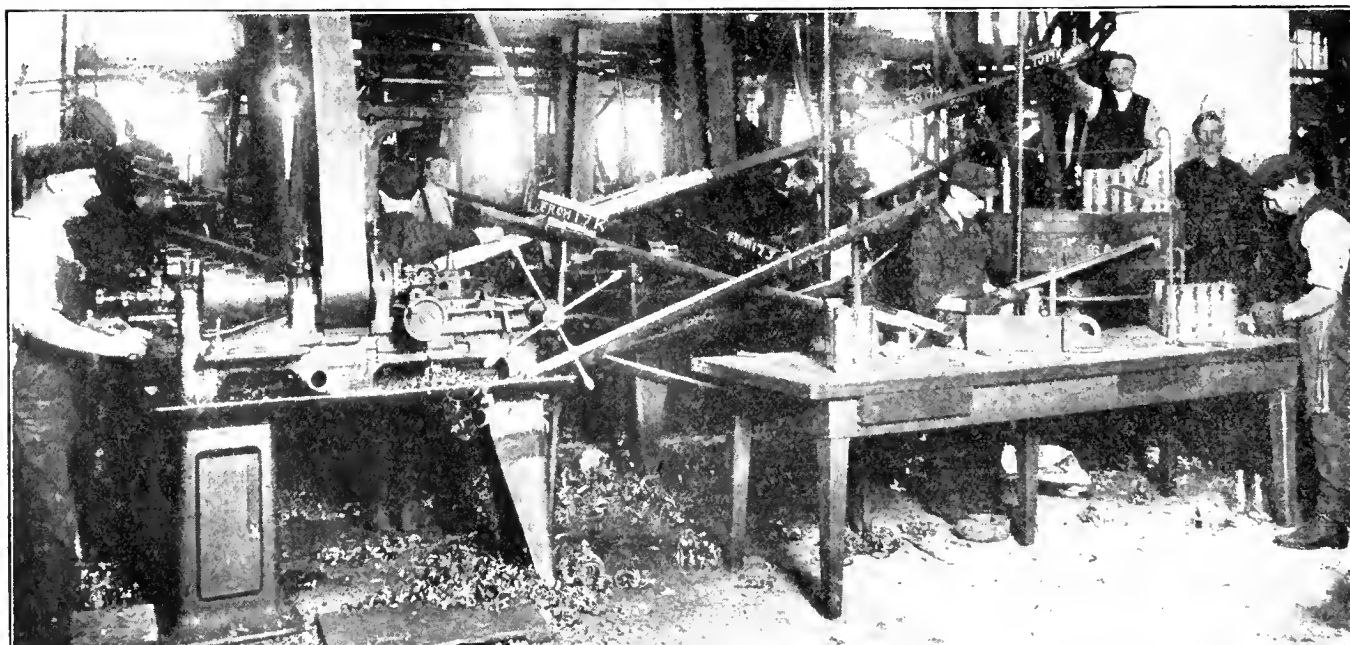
CHUTE SYSTEM FROM BANDING PRESS TO MACHINES AND THENCE TO INSPECTION BENCH.
